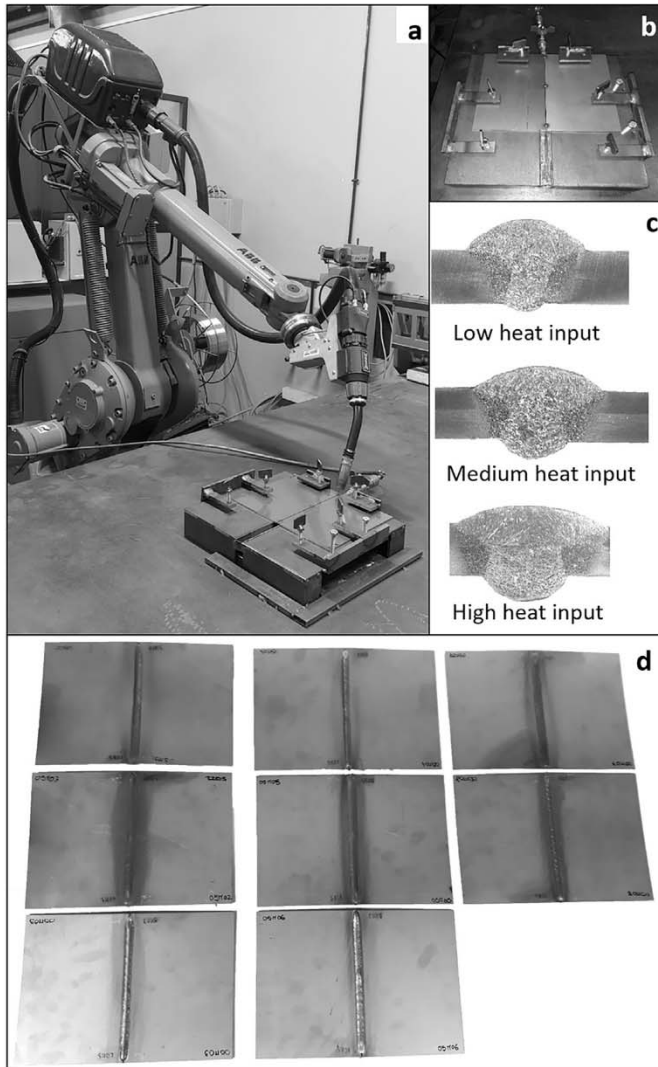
(a) An image of the welding robot. (b) Details of the anchoring system of the pieces during welding with the backing gas. (c) Macrographs of the coupons made with low, medium and high heat inputs. (d) Welding coupons.
